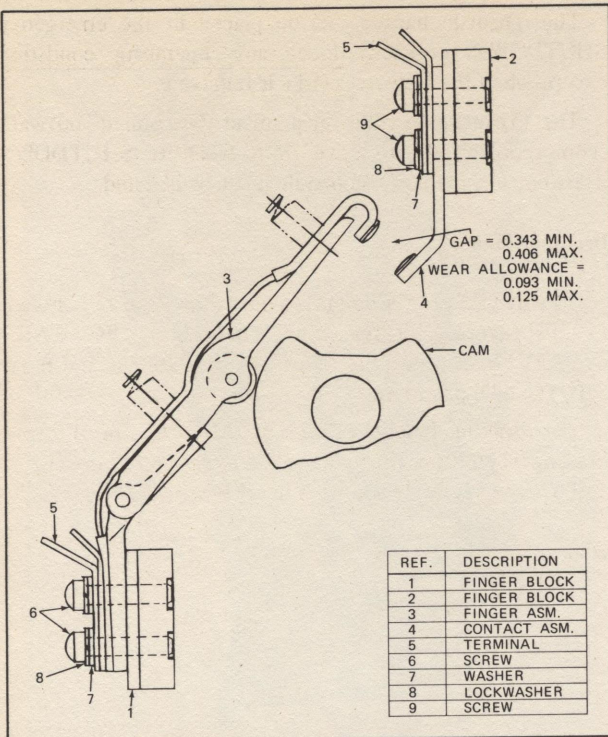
KC108 FINGER AND CONTACT ASSEMBLY.
